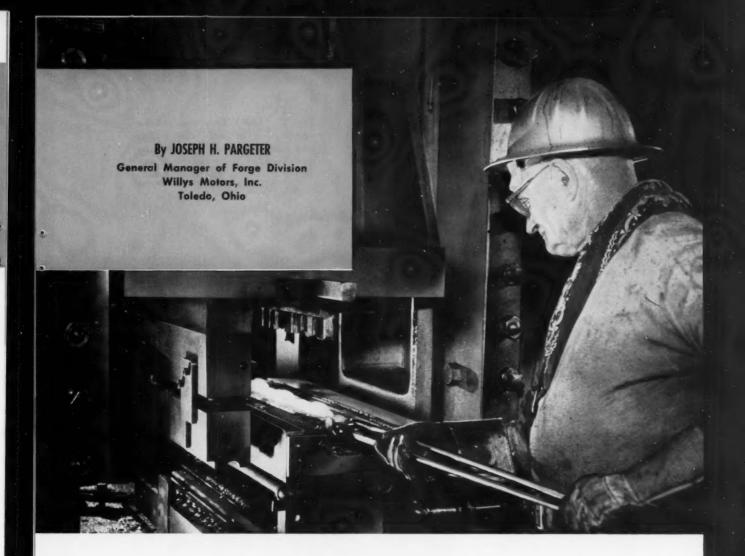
A crankshaft is being removed from the finishing impression in this forging operation. Subsequently, adjacent presses perform hottrimming and restriking operations.
